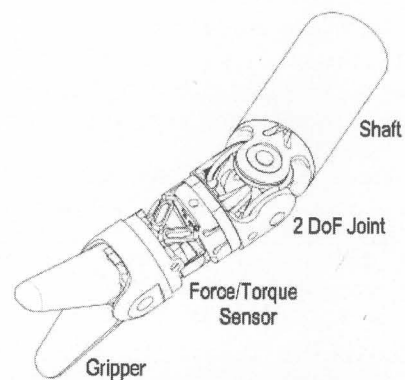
CAD model of the tool tip with hexapod and force/torque sensors
